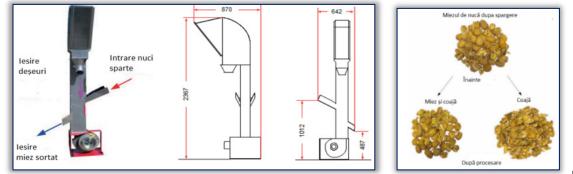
SEP 800 sorting and separating equipment a) General view and sketch with overall dimensions, b) Walnut kernel before and after processing, (https://www.amb-rousset.com/produit/separateur-pneumatique-800/)
